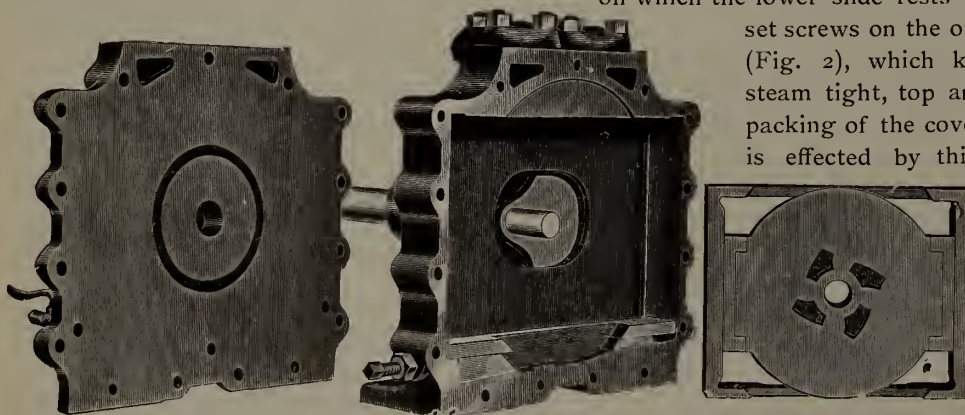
DAKE ENGINE, SHOWING PISTON WITH CYLINDER COVER REMOVED.
